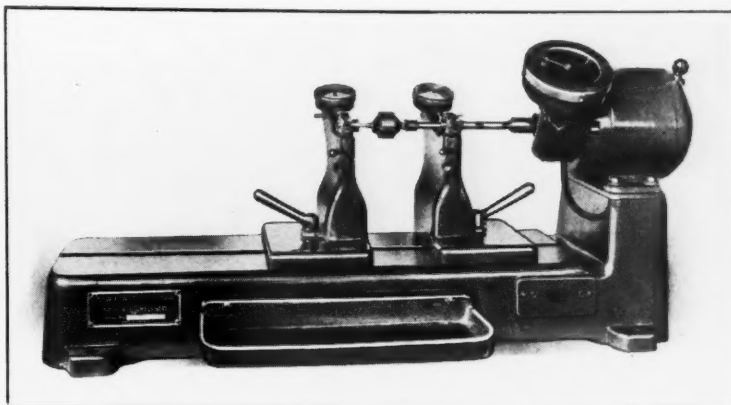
Globe Dynamic Balancing Machine in which a Neon Light is Employed
